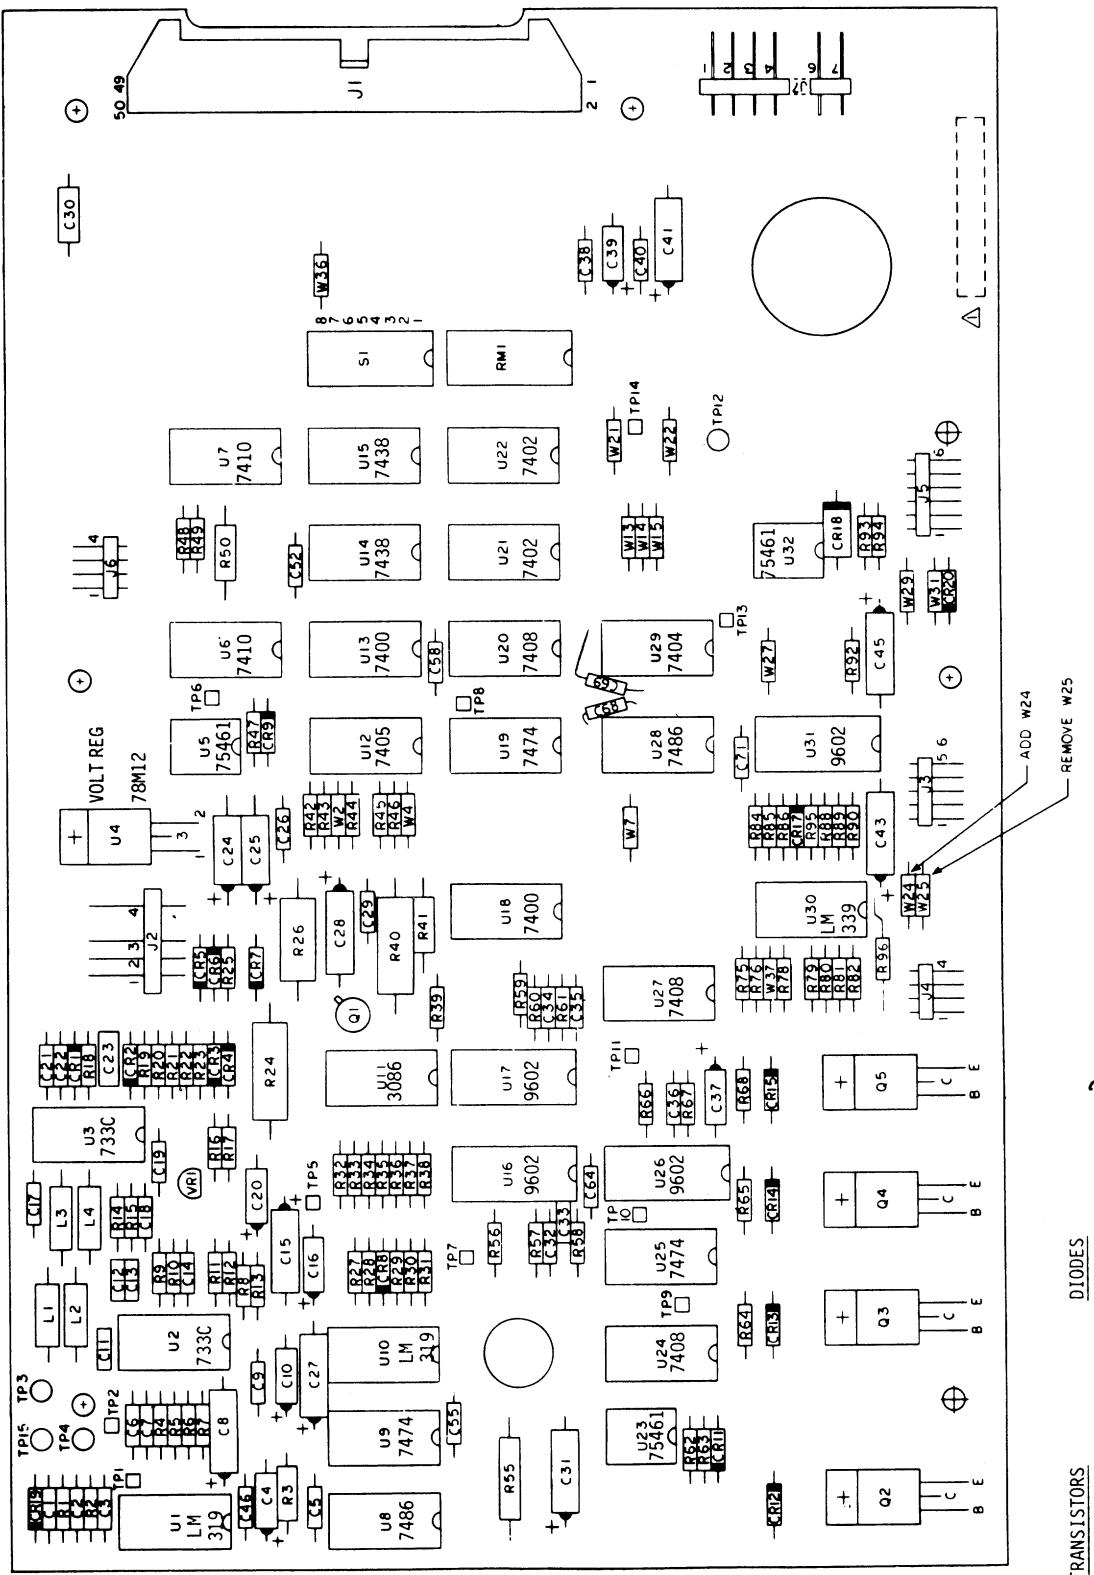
A. ASSEMBLY (SHEET 1 OF 3)
